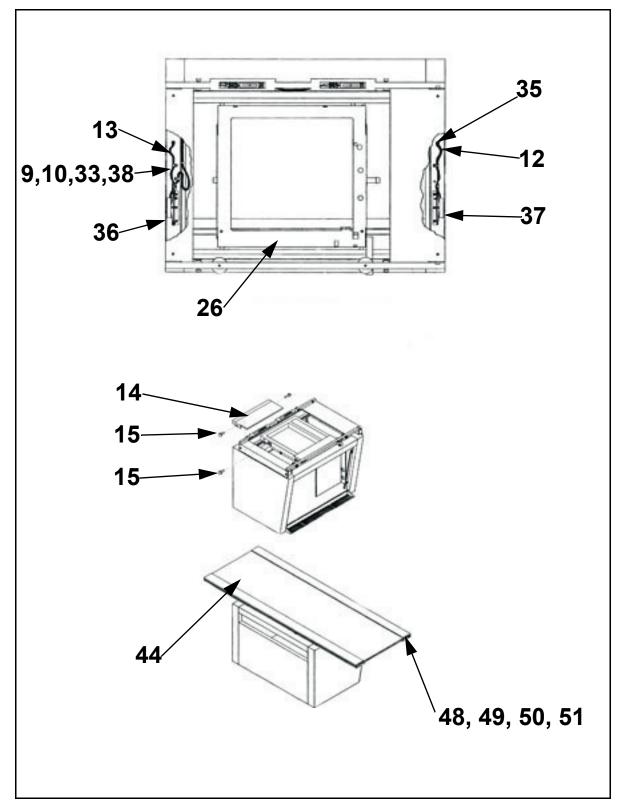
Basic Table Assembly (Sheet 2 of 2)
